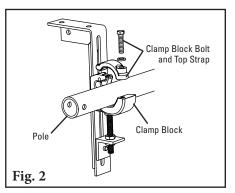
Do not fully tighten the clamp block bolts on either side.
